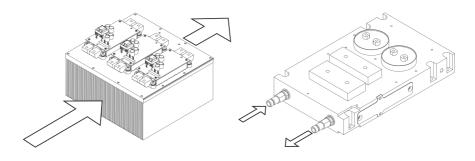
Examples of an Air-Cooled Heatsink and a Liquid-Cooled Heatsink
